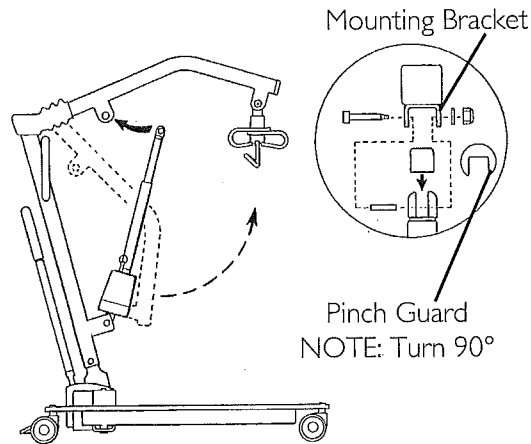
Assembling the Electric Actuator to the Boom
